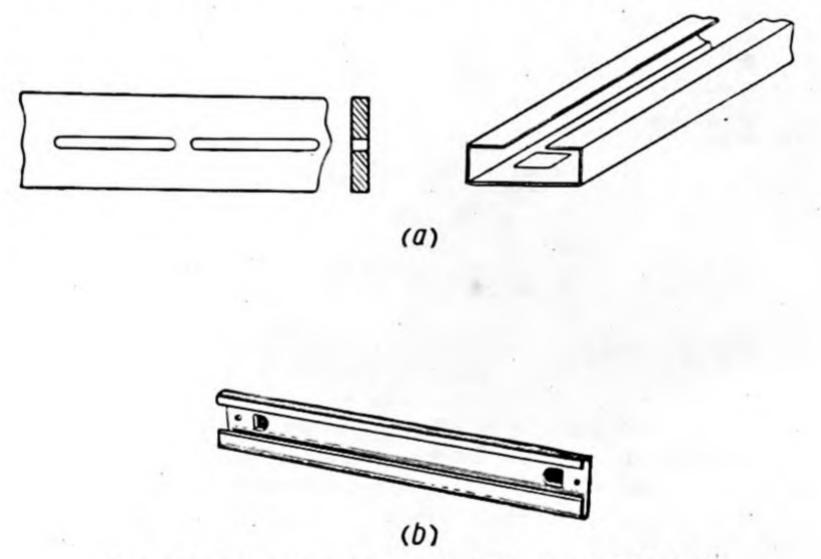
Components for securing unit terminal blocks: a—perforated strip; b—special-section shapes
